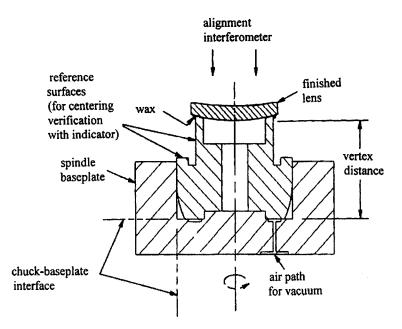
The centering chuck installed on the SPDT machine spindle with the lens waxed in place and centered interferometrically.
